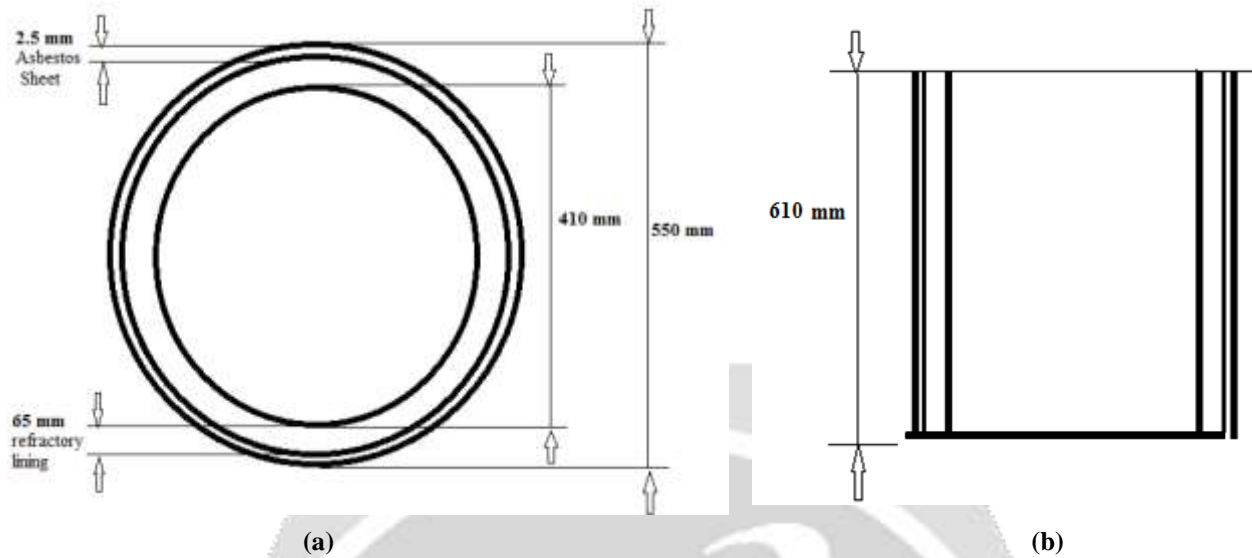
(a) Top view, and (b) Cross-sectional view of the dimensions of induction furnace
